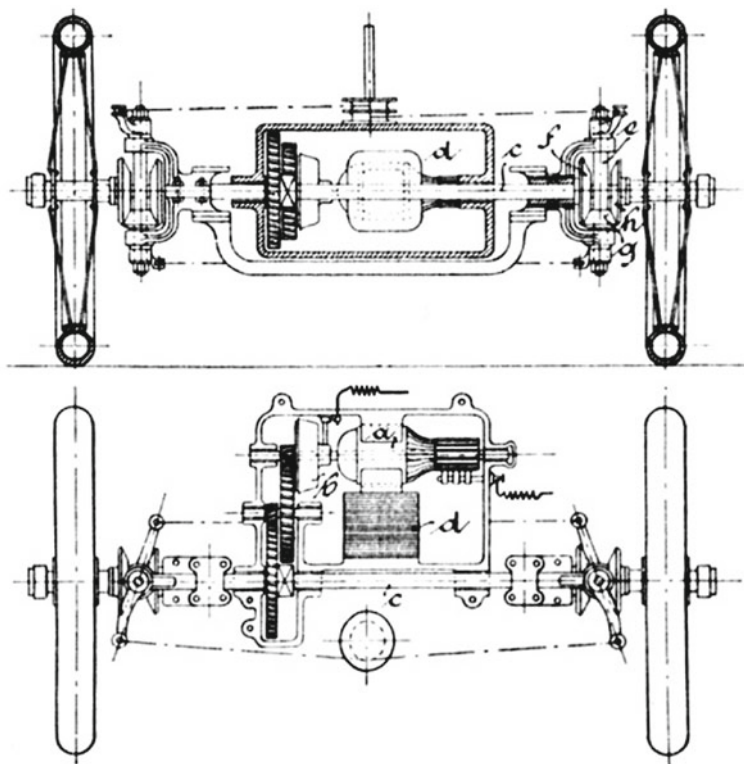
Front and top view of the driving and steering front axle of a Jeantaud Fiacre (From Dinglers Politechnischer Journal 1899)
